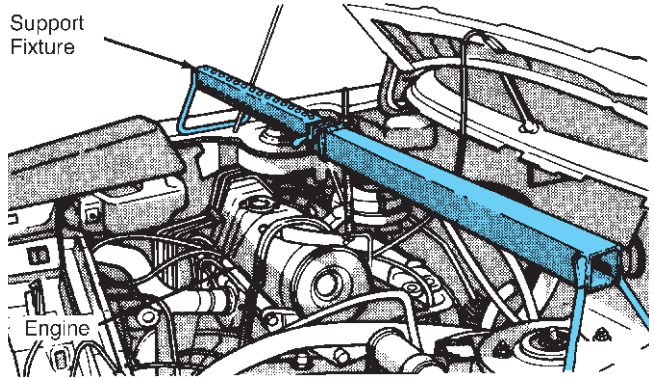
With most FWD vehicles, it is usually necessary to a fixture to support the engine before removing the transaxle. (Courtesy of DaimlerChrysler Corporation)
